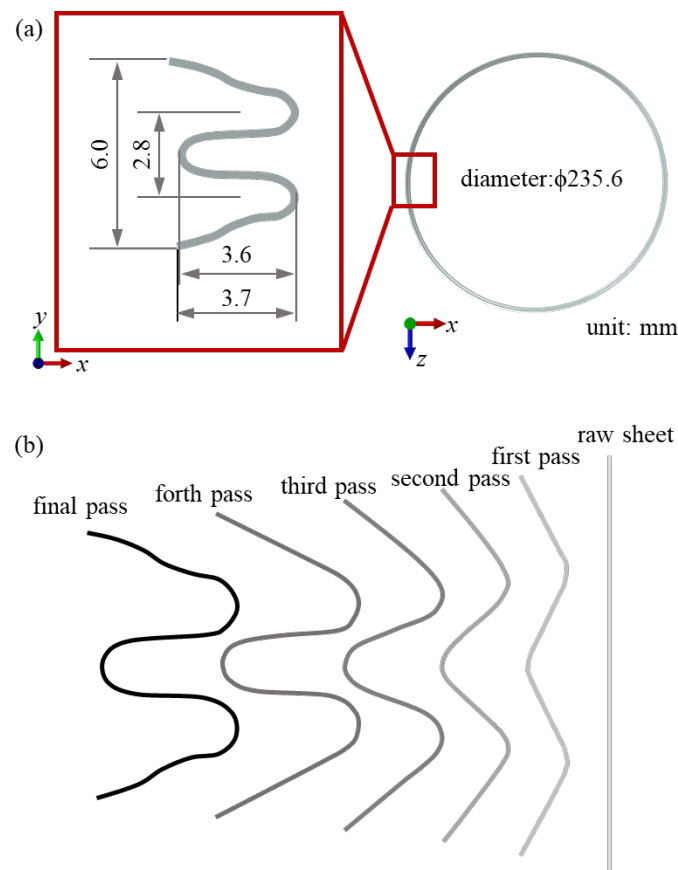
The geometry of W-shaped metallic sealing rings [5]. (a) Dimensions of the cross-section and the ring; (b) schematic illustration of the multi-pass rolling forming track.
